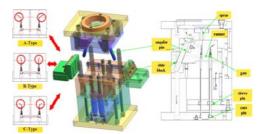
Detail scaler tip mold of 2D/3D drawing.
